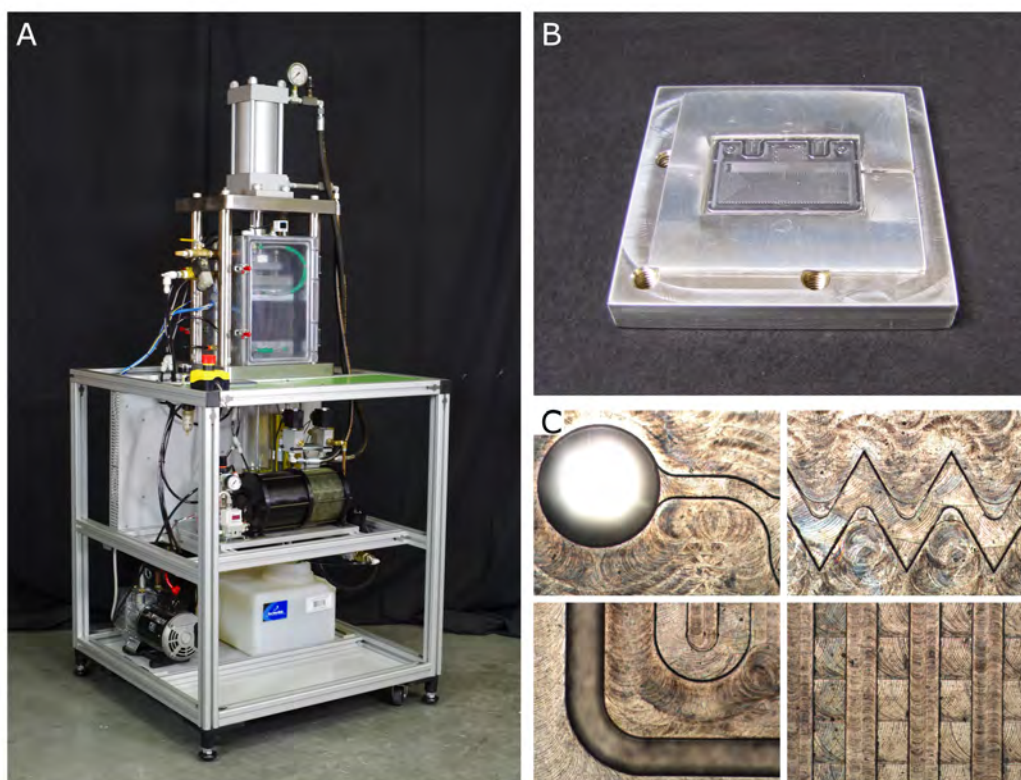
Pictures of CMI hot-press and hot embossing PCR mold. A) Picture of CMI custom-made hydraulic hot press. B) Picture of the PCR chip mold used for hot embossing. C) Close view of some features of the PCR chip mold.
